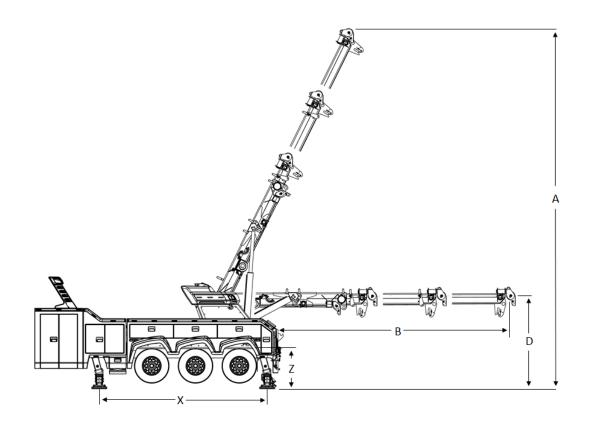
BOOM AND OUTRIGGER DIMENSIONS - SIDE VIEW (EXAMPLE)
